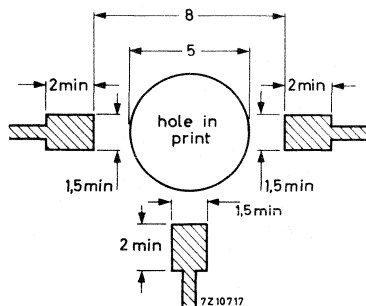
Requirements for fibre-glass print. (Dimensions in mm.)
